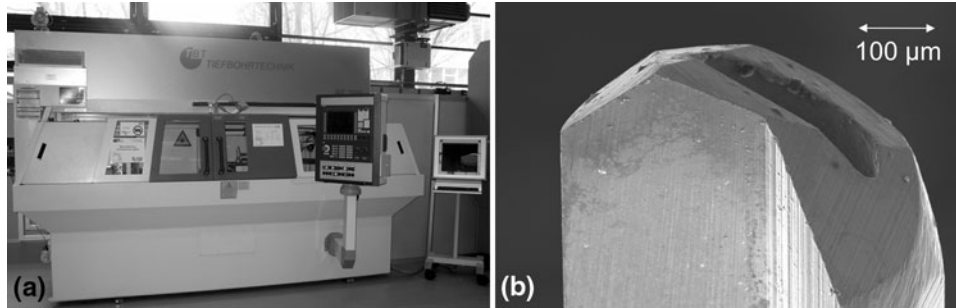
(a) Machining center and (b) micro-single-lip drill with a diameter of $d = 0.5$ mm
